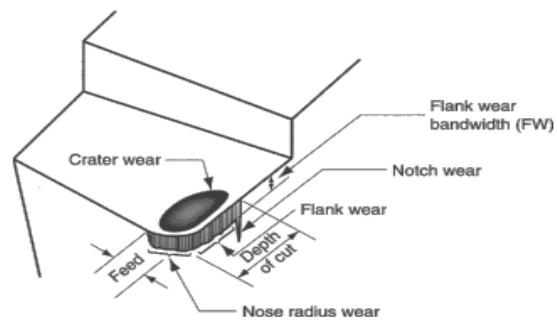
Diagram of worn cutting tool, showing principal locations and wear types [19].
